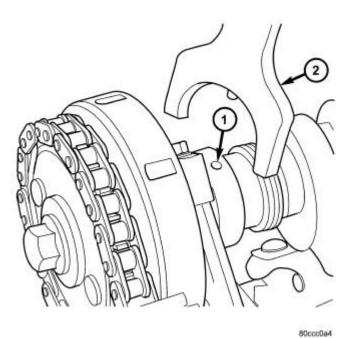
Special Tool 8428 Courtesy of CHRYSLER LLC
